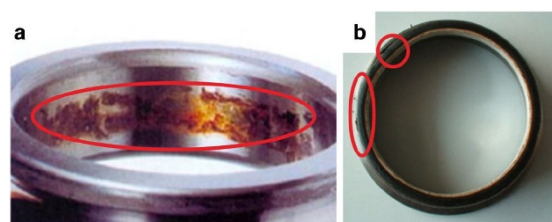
Images of component damage caused by solid particle contaminants. a) Scratch of solid particles on bearing inner ring. b) Damage on rubber seals ([1])
